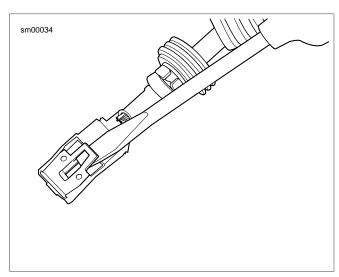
Delphi 800 Metri-Pack Sealed Main Fuse Housing: Bend Tang
